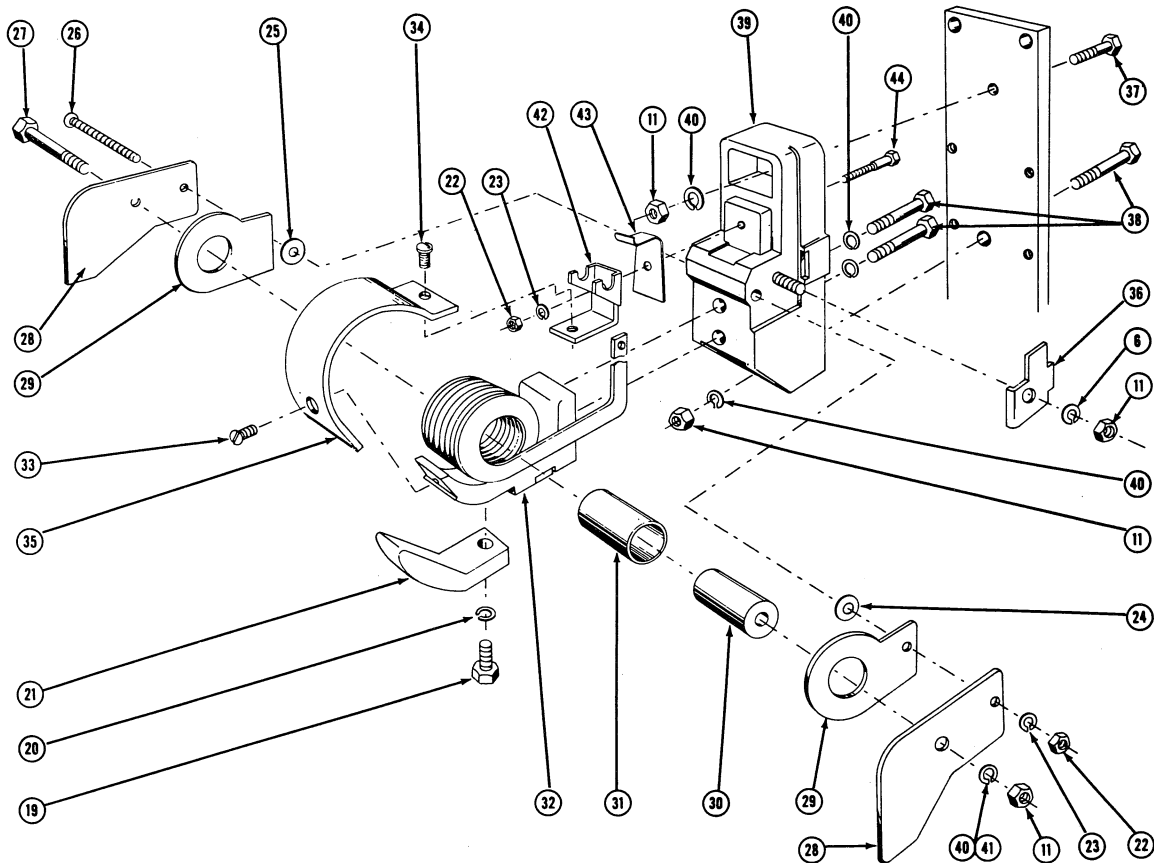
Exploded view, Armature, Coil — Arc Shield Assembly.
